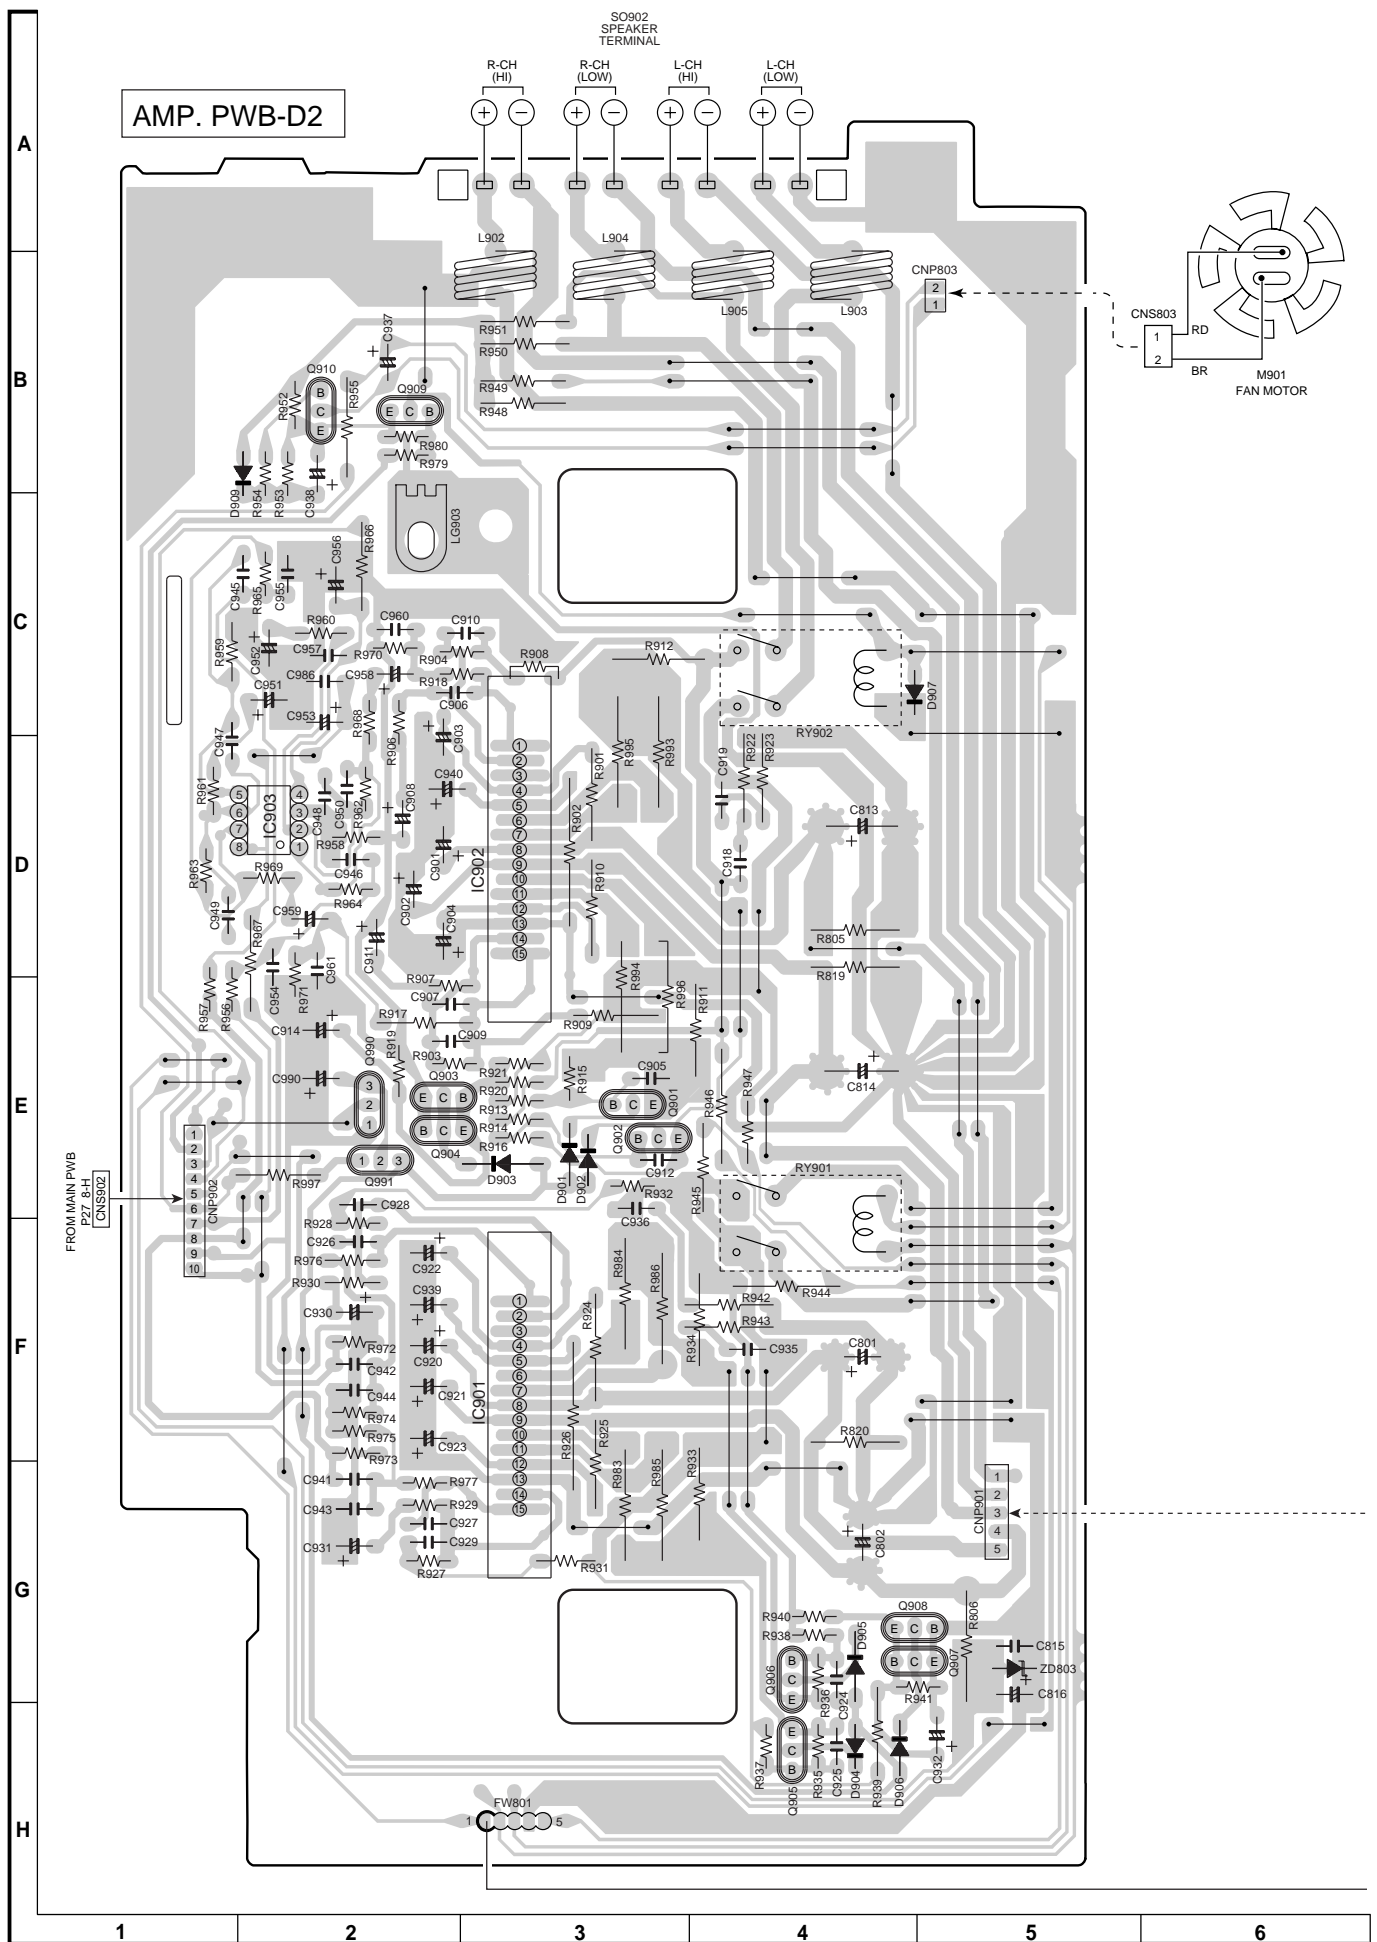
WIRING SIDE OF P.W.BOARD (5/8)
